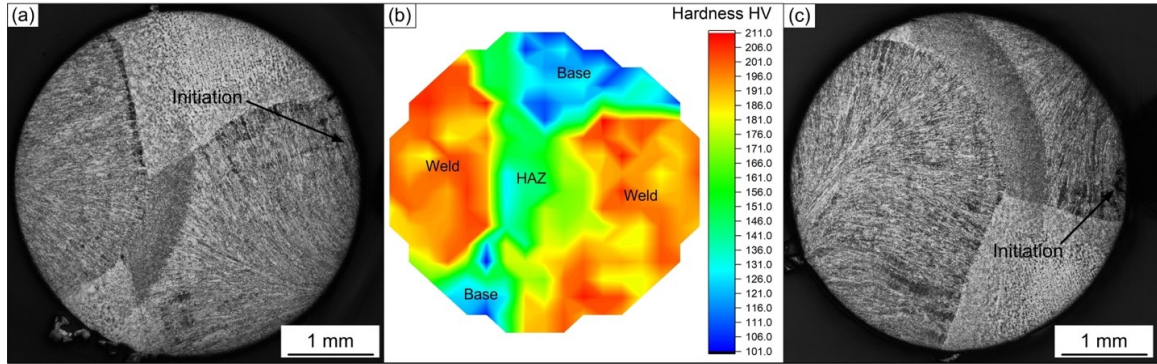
(a) macrograph of Specimen C shows fatigue crack initiation, (b) hardness map of Specimen C, and (c) macrograph of Specimen D
